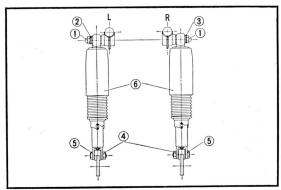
Mounting bolt and nuts of rear cusnion
